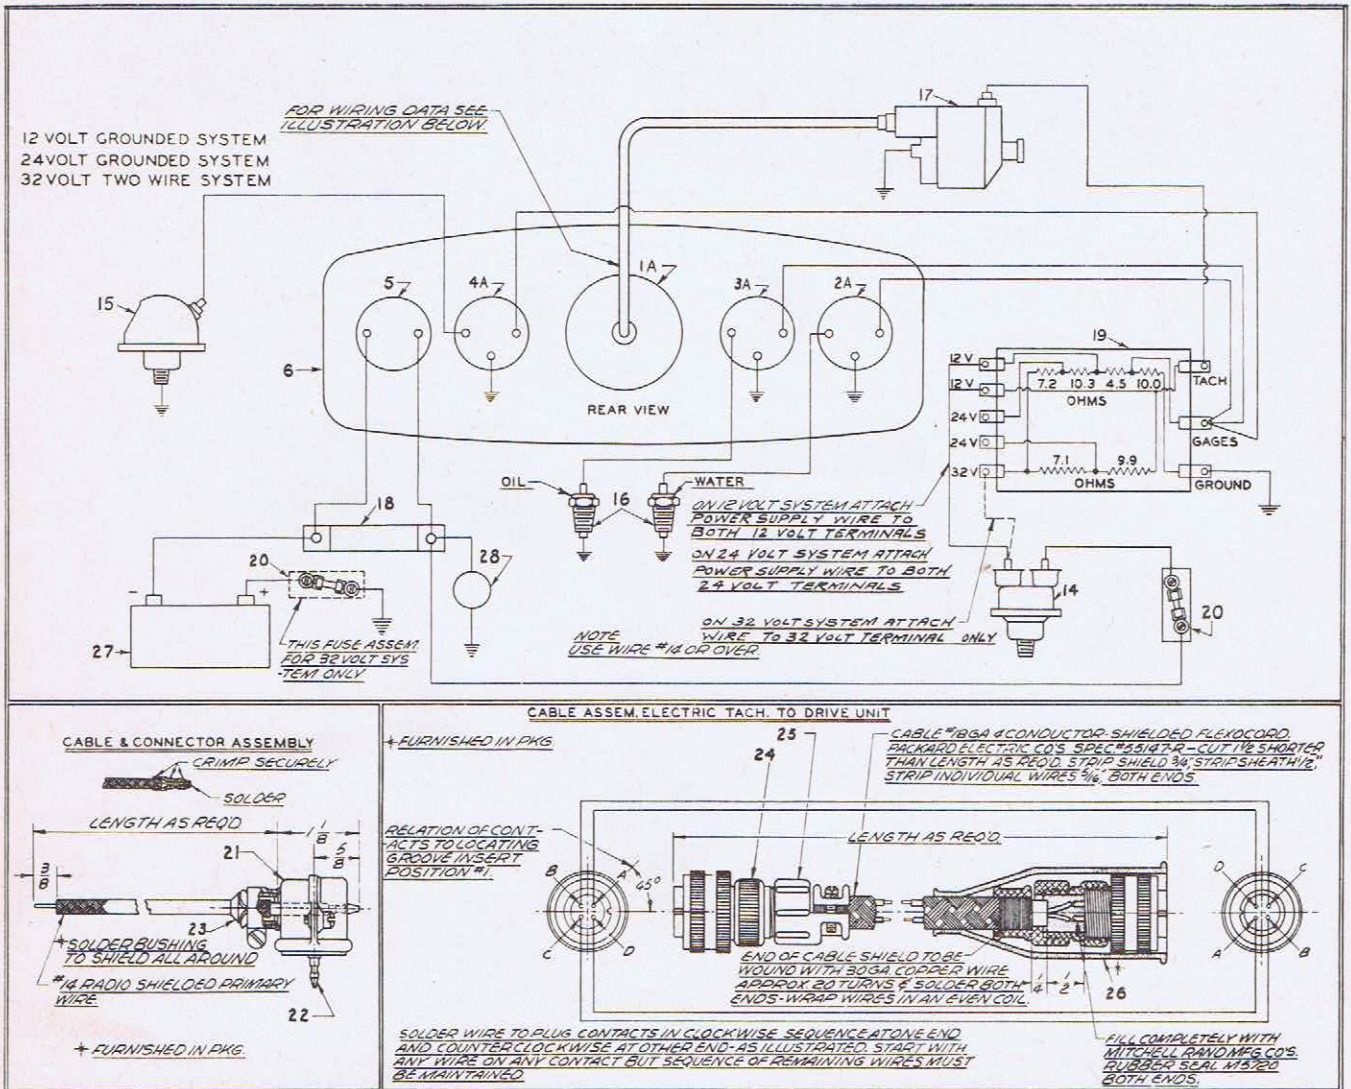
WIRING DIAGRAM—ELECTRICAL INSTRUMENT PANEL FOR SINGLE ENGINE UNIT.
